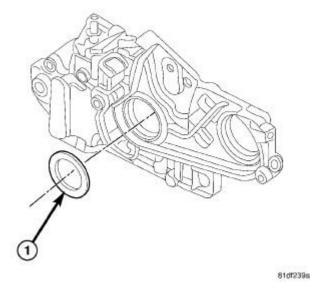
Front Crankshaft Oil Seal Courtesy of CHRYSLER LLC
